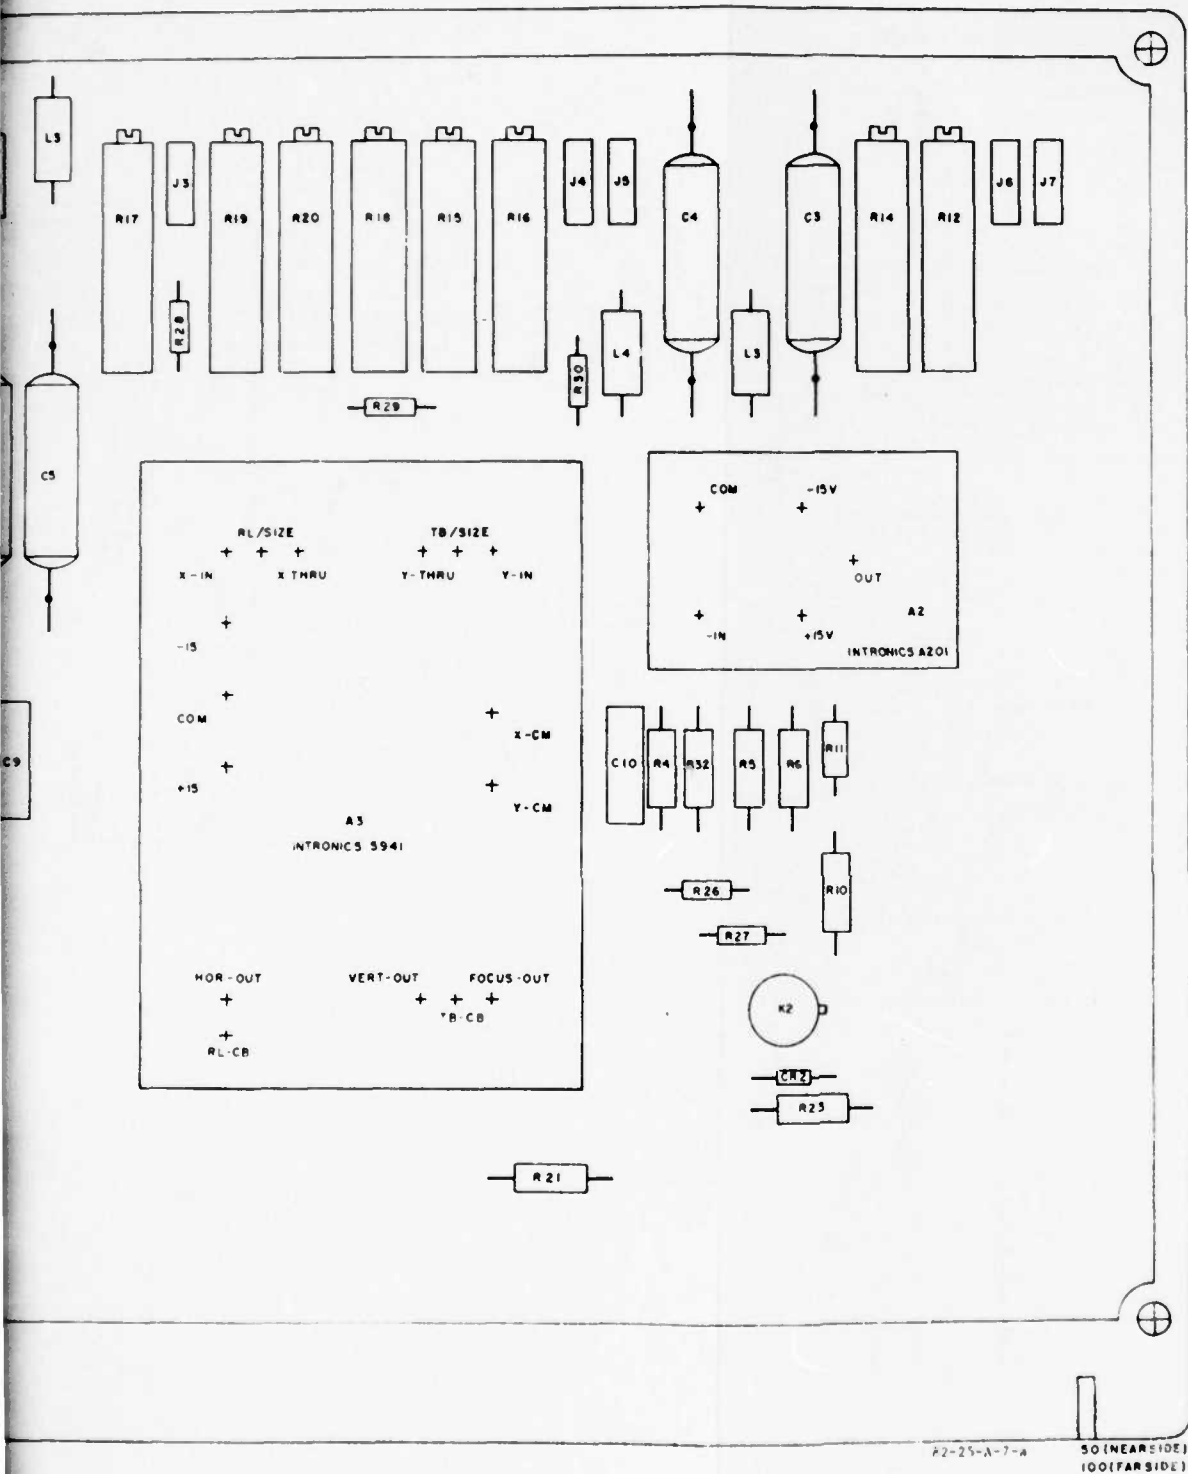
UNMODIFIED A5 PCB (SHEET 1 OF 2)
